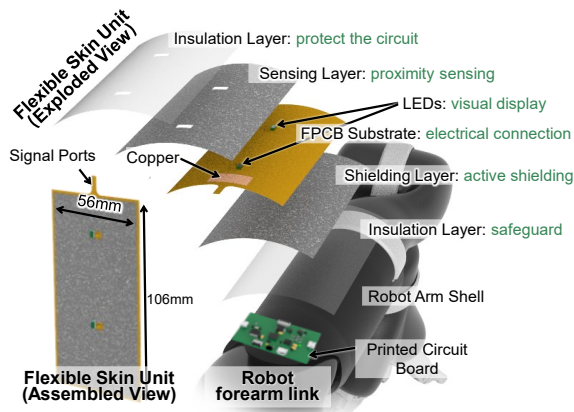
Diagram of a flexible skin unit (SU) using the five-layer structure and its installation with a printed circuit board on a robot link (exploded view). All the layers are laminated to each other to form an SU (assembled view).
